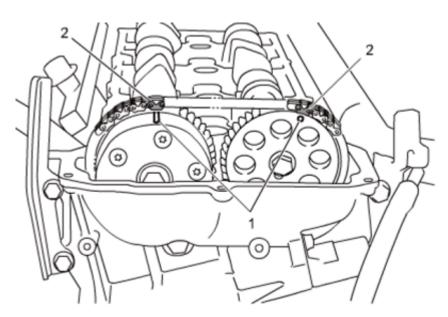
Identifying Timing Marks On Exhaust Camshaft Timing Sprocket Courtesy of SUZUKI OF AMERICA CORP.
